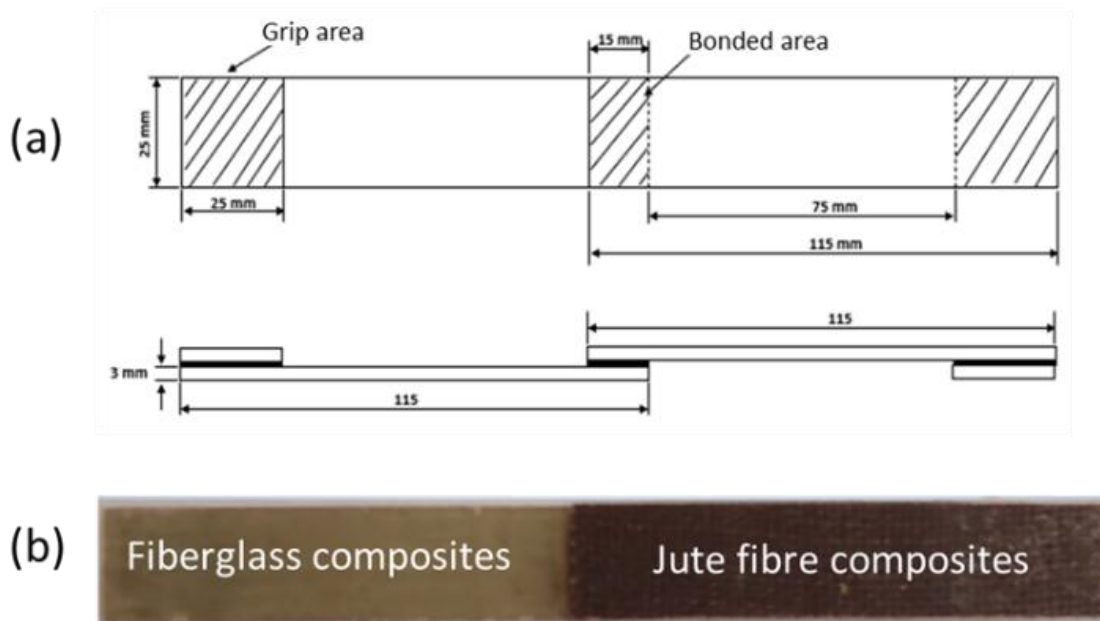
(a) Dimensions of single lap joint specimen, (b) Photograph of joint specimen
